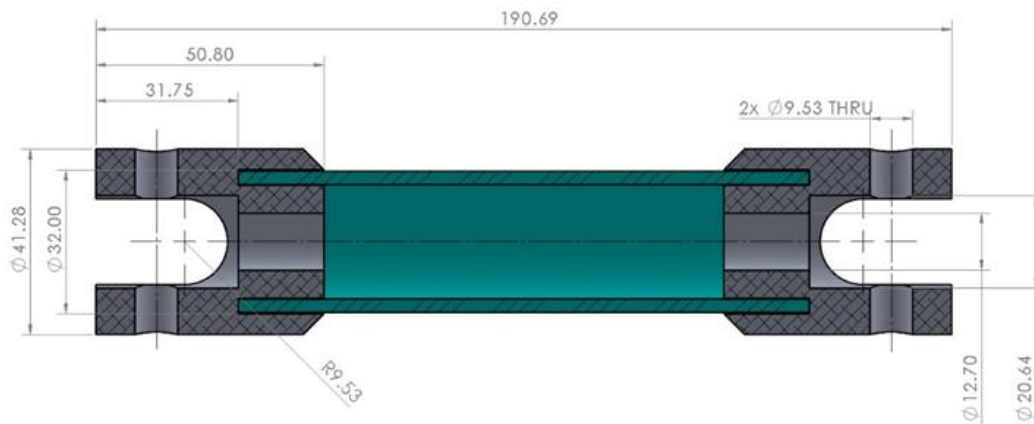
Cross-sectional diagram of test specimen assembly (dimensions in mm).
